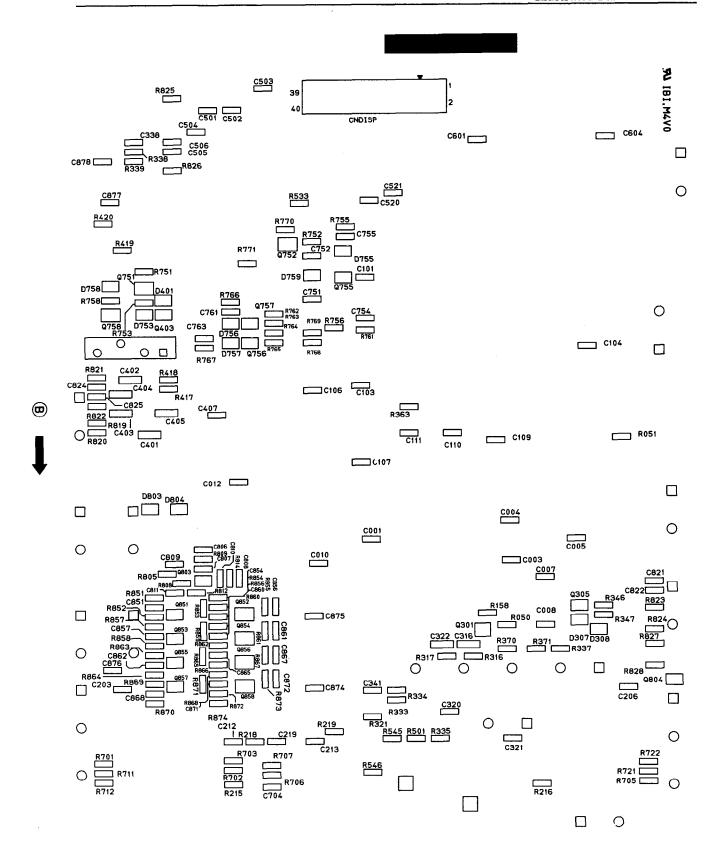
(Sheet 2 of 2). CPU PCB - Solder Side
